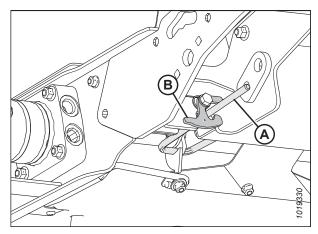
Feed Deck Pan Handle and Left Side Pan Handle Latch
